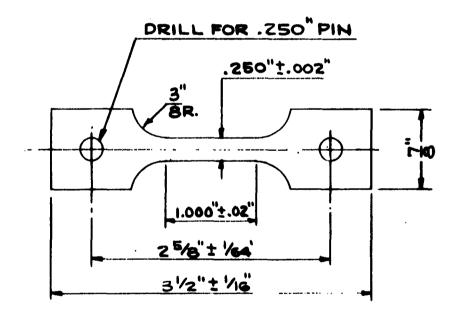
DIMENSIONS OF TENSILE SPECIMEN
